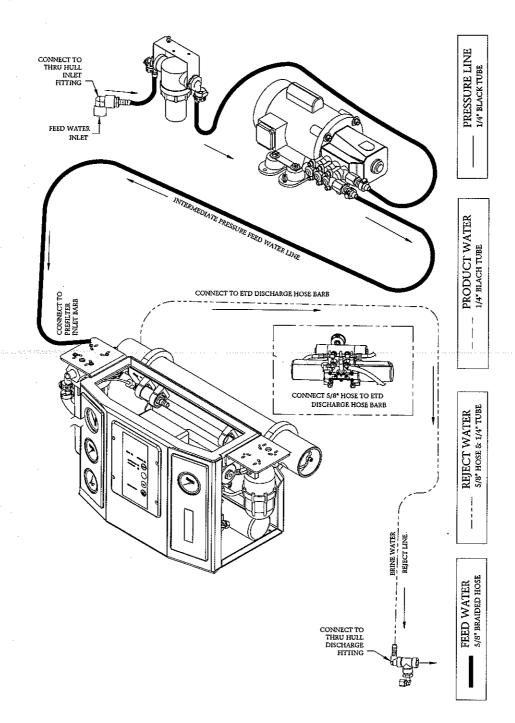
Illustration of the 5/8" braided hose connections on a Compact System.
